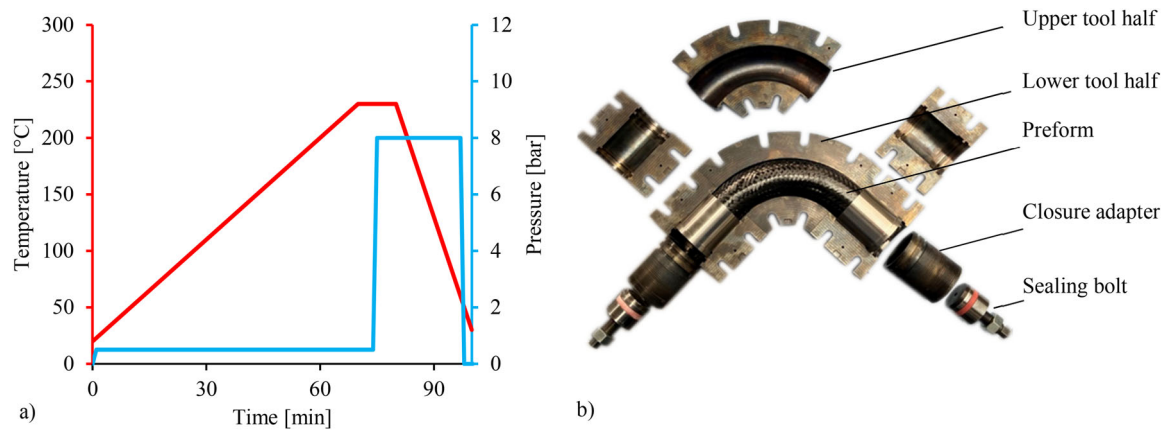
Schematic representation of the consolidation process for BAM (a); Multi-piece molding tool (b).
